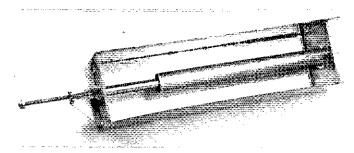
Final assembly of a single cavity. Tack-solder the side plates to the end plates and carefully check alignment of the tubes prior to soldering the seams full length. After all seams are fully sealed, lay the final side in place and solder all seams.
